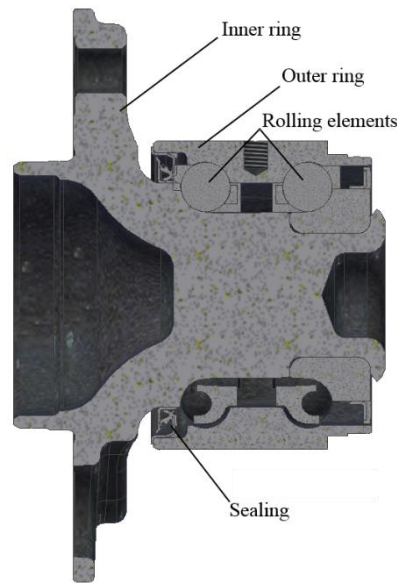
Design of SKF Wheel Hub Bearing BAR-0230
